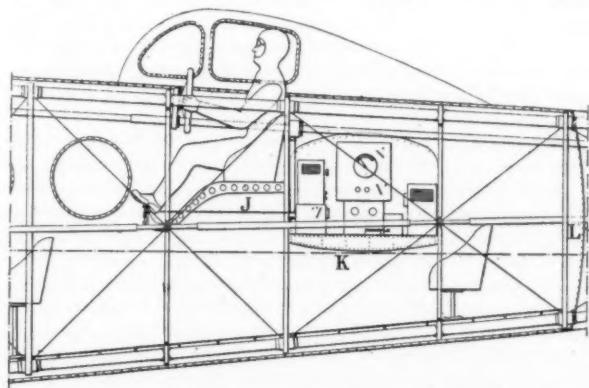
SECTION SHOWING THE PILOT'S HOOD
